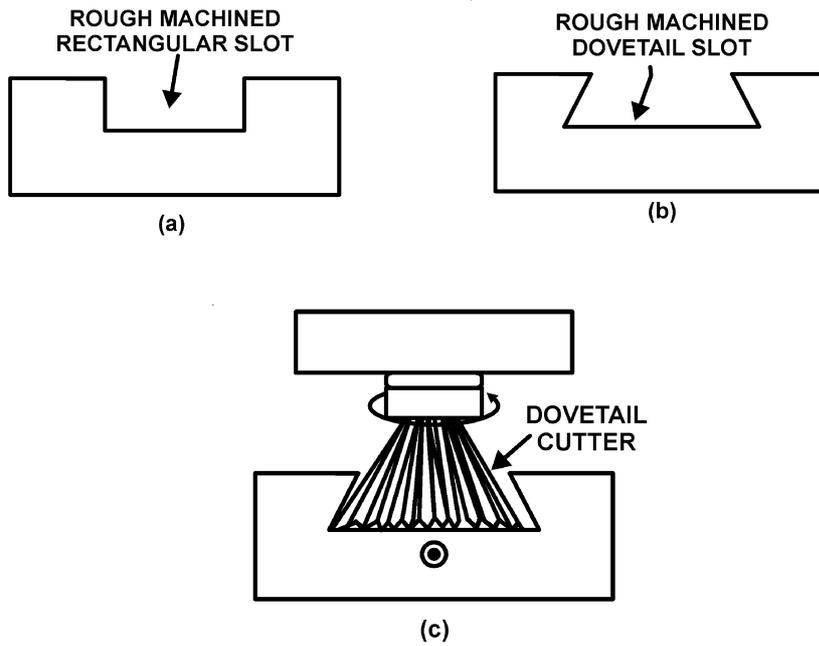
, Milling a Dovetail slot. (a) Rough machined rectangular slot, (b) Rough machined dovetail slot
